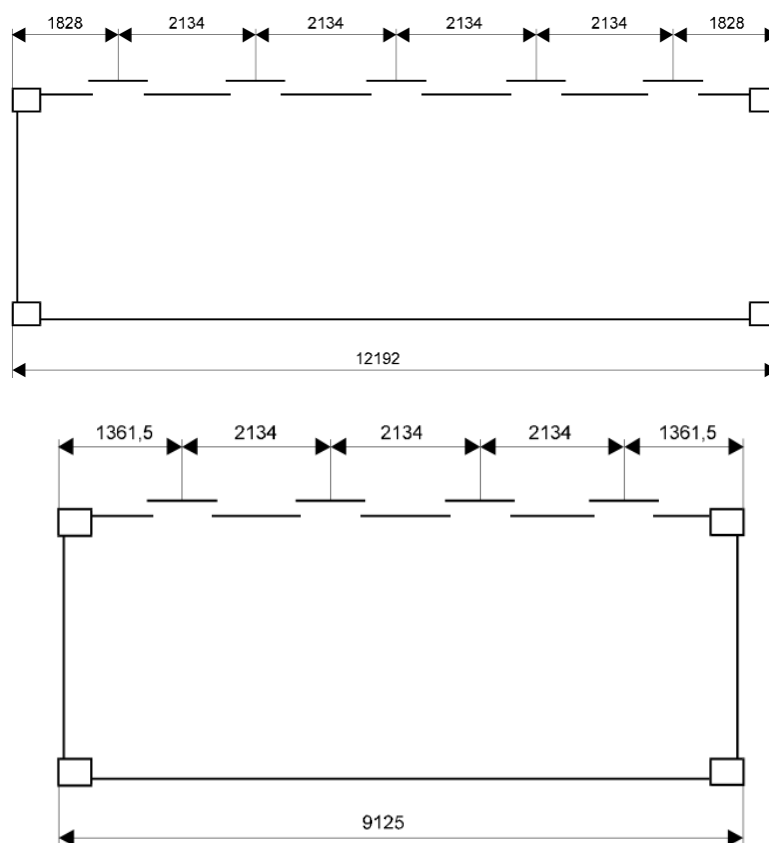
Examples of the arrangement of openings for loading dry bulk cargo in non-pressurized box type containers
